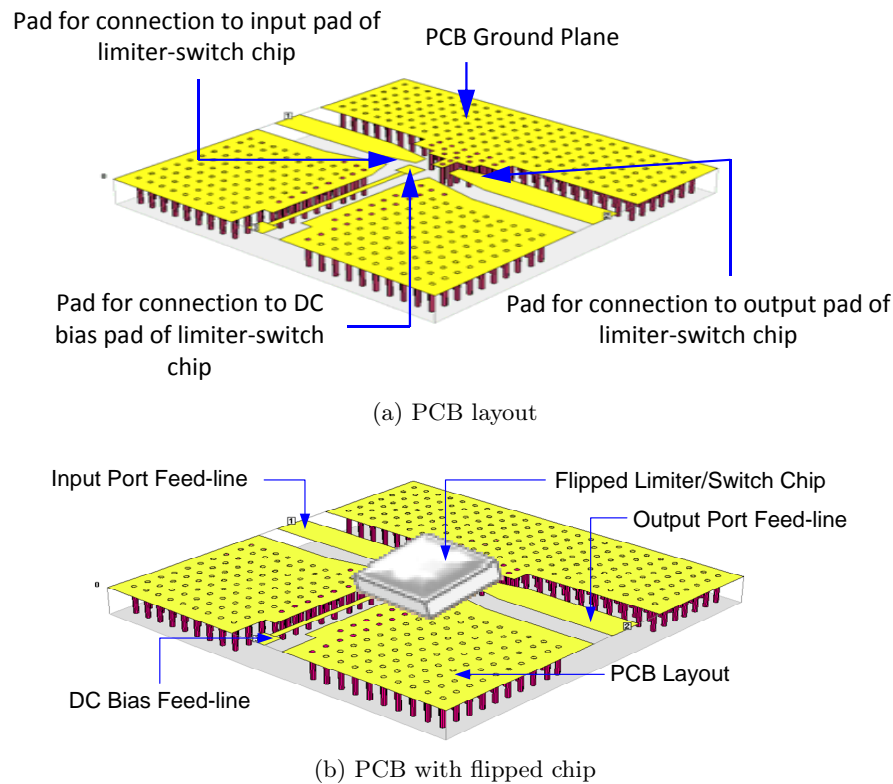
Limiter-Switch Chip Flipped on a PCB
